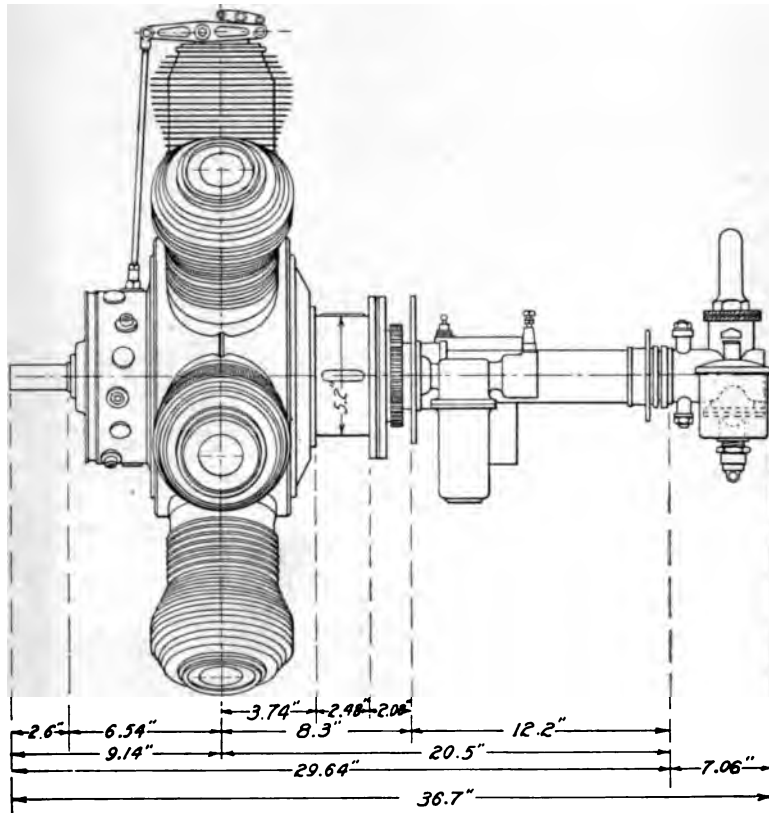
End View of Seven-Cylinder Gnome Motor, Giving Dimensions
